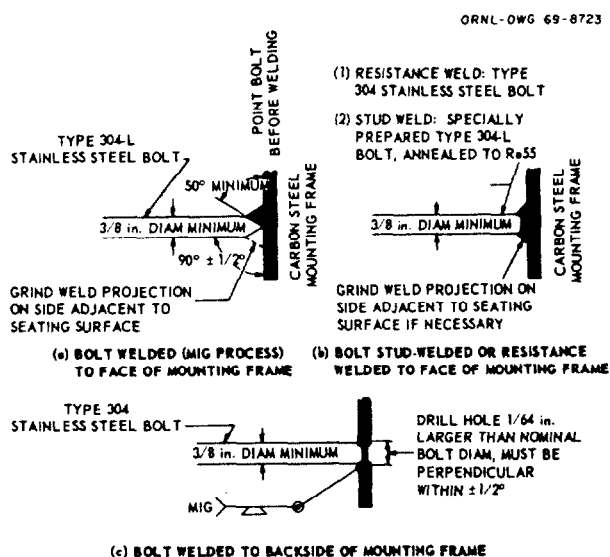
Methods of welding clamping bolts to filter mounting frames.
